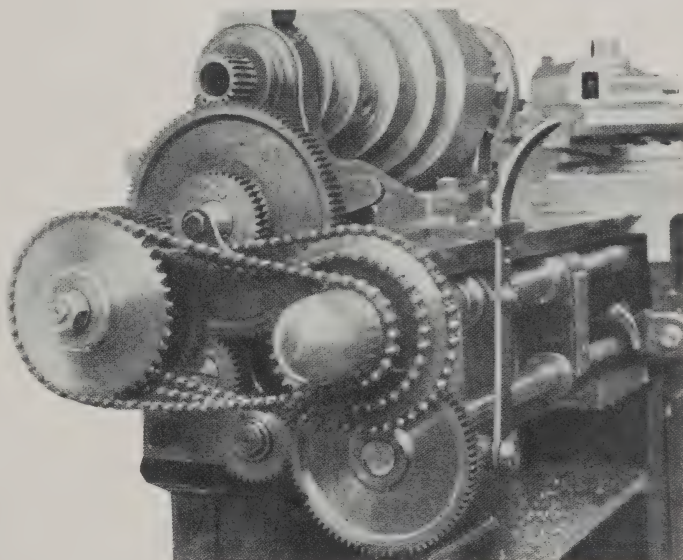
ROLLER CHAIN FEED-GEAR.
